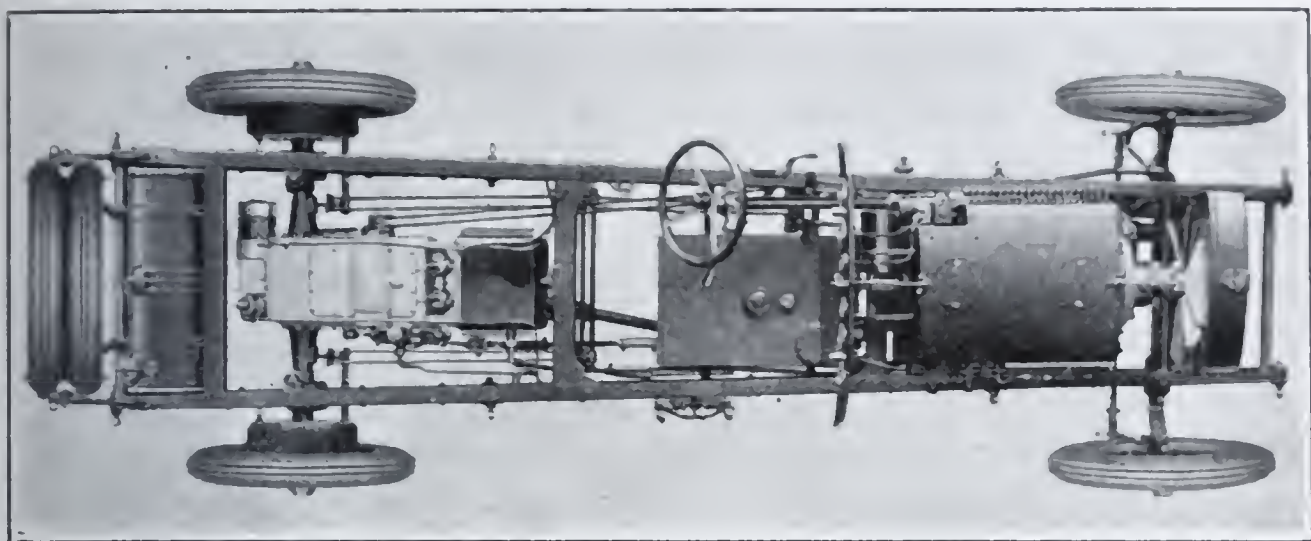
Airplane View of Chassis of Double-Detroit, Showing Complete Power-Plant.
